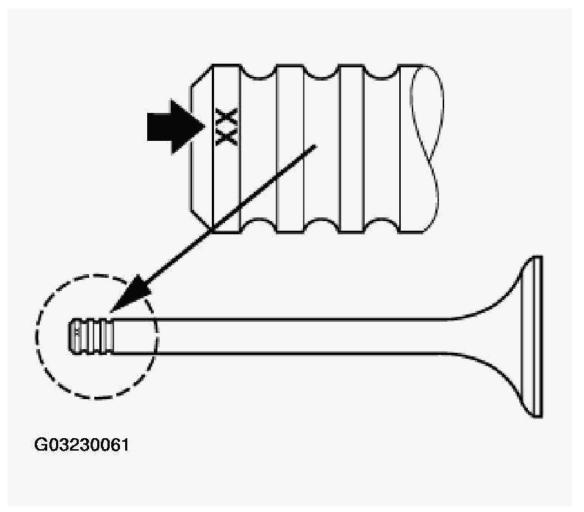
Identifying Repair Valve With Larger Shaft Diameter Courtesy of BMW OF NORTH AMERICA, INC.
